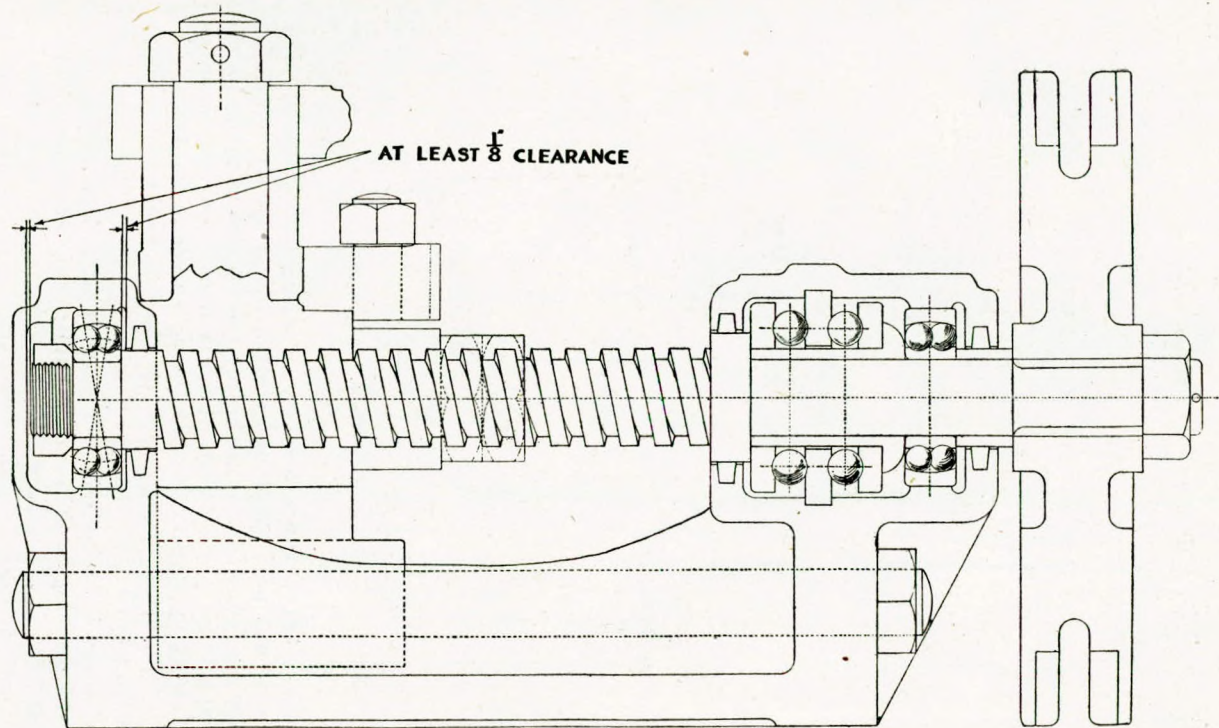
shows our special type hanger, which can be adjusted to any required drop. Our standard 1500 Adapter type bearing is enclosed in this hanger, and will run without attention for three or four months, when the latter has been filled with grease. The bearings are self-aligning, and so counteract all deflections of the shaft without binding the bearing. Since there is no wear down with resultant play, instant movement from rest is assured. These bearings possess all the necessary features of an ideal bearing for Steering Gear Control Shafting. In the Gear Wheel Brackets we fit a single thrust bearing to take up the thrust and thus to keep the gear wheels constantly in mesh. Coming to the rudder, I have here shown (Fig. 7), an application to the actuating gear of Kitchen's Patent Reversible Rudder. The thrust is taken by our standard D.L. type double thrust bearing, and the radial load by our standard R.L. type. This application has been approved, and is being fitted throughout these units.
